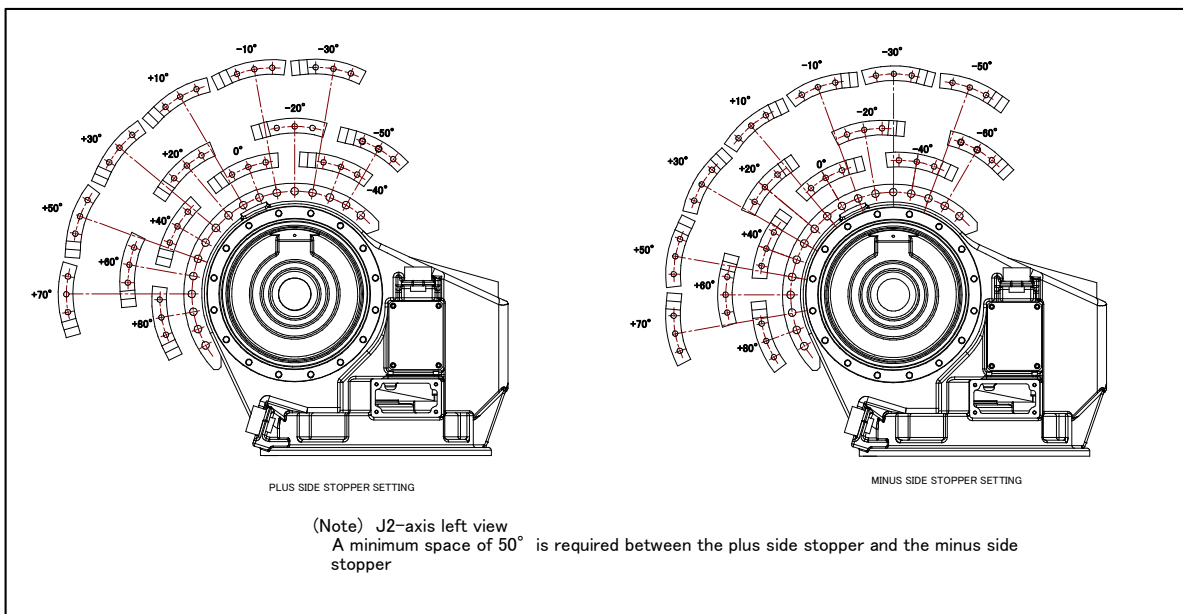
(c) Attachment of J2-axis adjustable mechanical stopper
